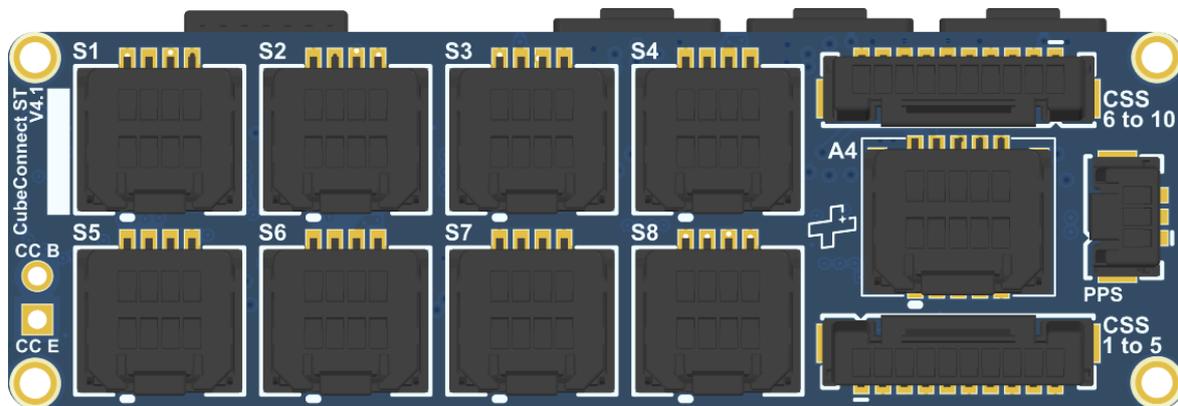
CubeConnect PCB (PC104 Variants) – Exterior (Front) View
